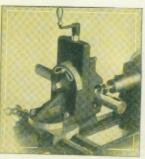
Milling a Woodruff Keyway in a Steel Shaft.
